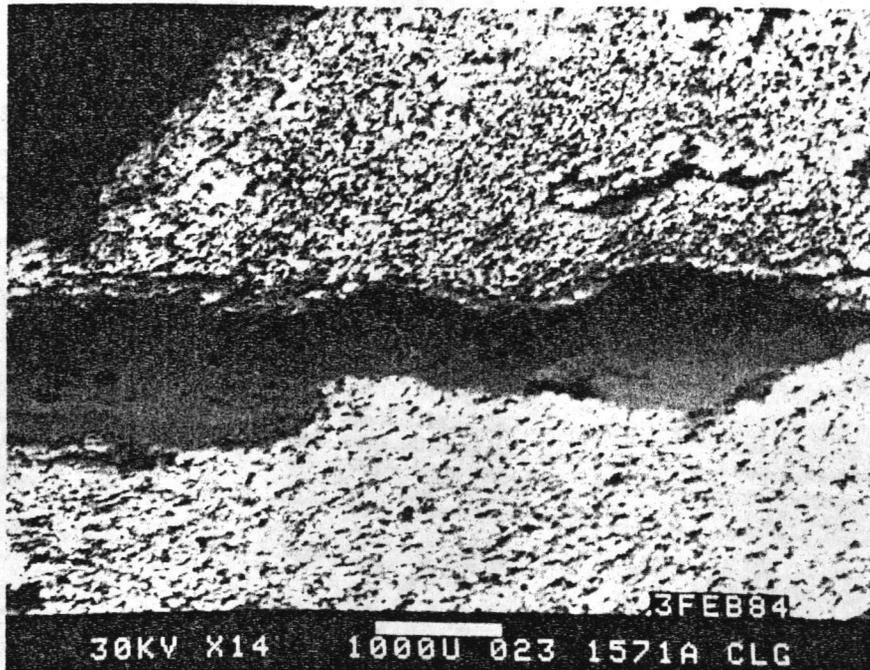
View Showing Secondary Pocks In Side Of Eroded Channel, Oblique View of Area in Photo 7
